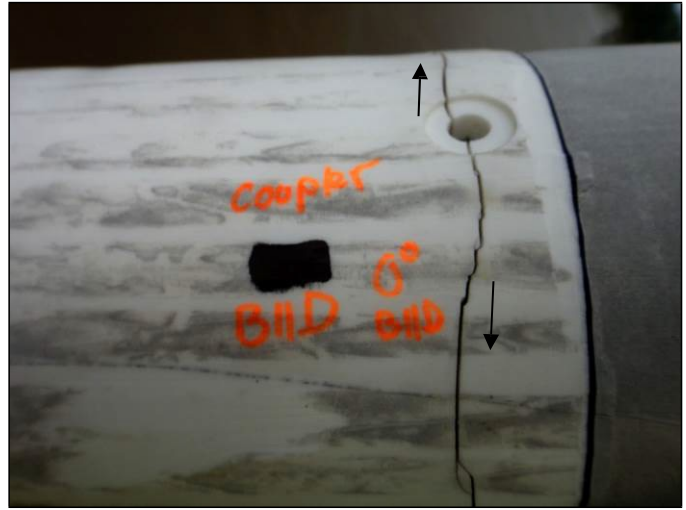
B11D: Reducer Crack at Coupler Hole Used For Electro-Fusion Weld
